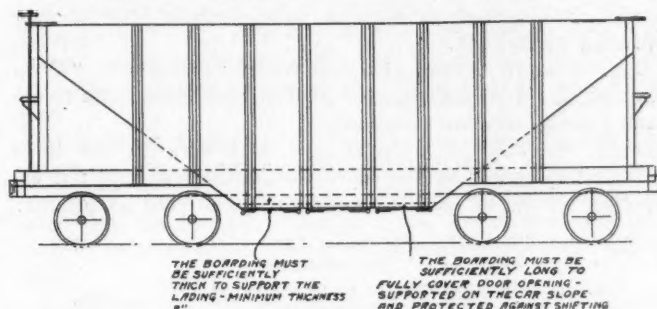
Rule 98-A. Diagram of Hopper Bottom Car Showing the Application of False Bottom for the Loading of Pig Iron Billets, Small Castings, etc.
